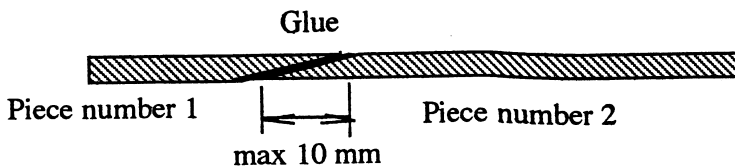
Spliced Joint - a stronger joint than a butt joint.
